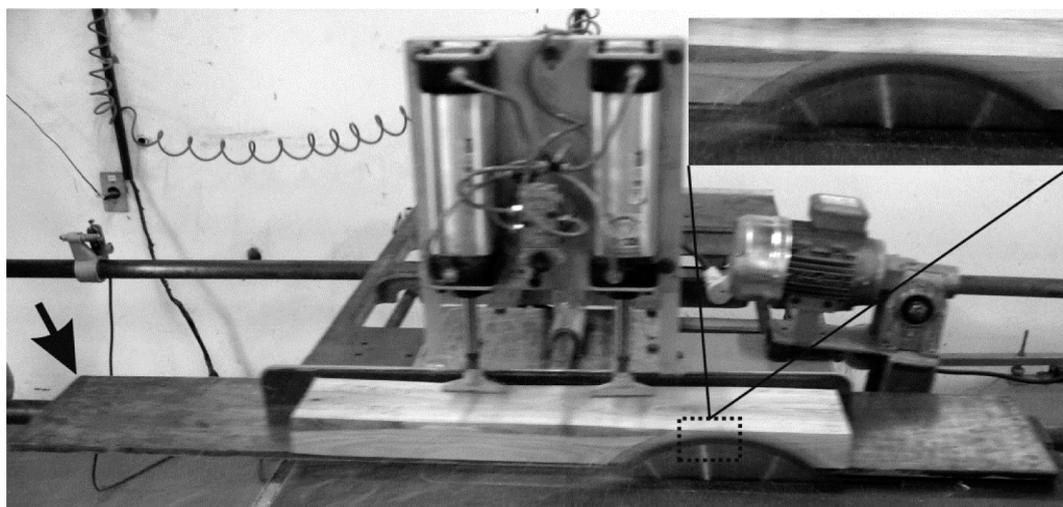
Mechanical processing the specimen, table adapted to the circular saw with sliding table (arrow); cut made with 5 mm thickness (dashed square).
